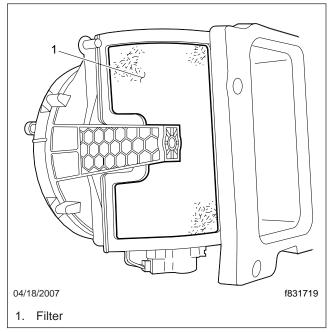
, Cab Recirculation Air Filter (shown out of the vehicle for clarity)
